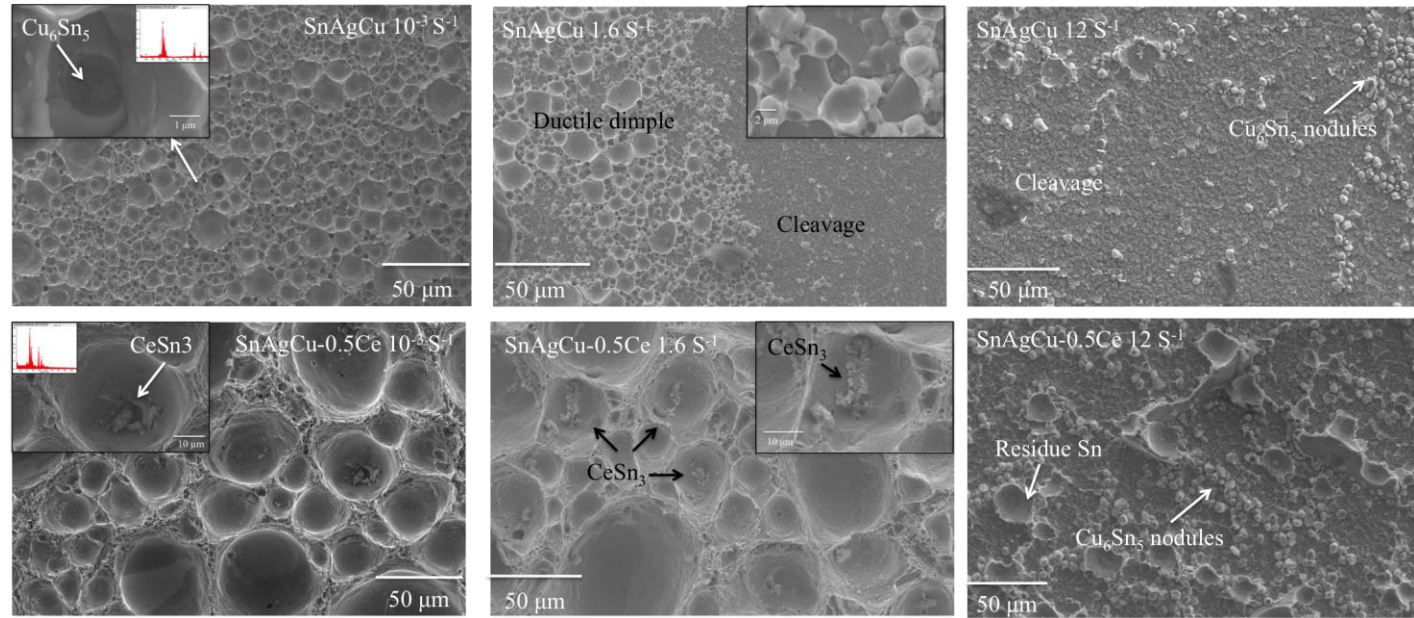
Tensile fracture morphology of Sn-3.9Ag-0.7Cu (top row) and Sn-3.9Ag-0.7Cu-0.5Ce (bottom row) solder joints at different strain rates.
